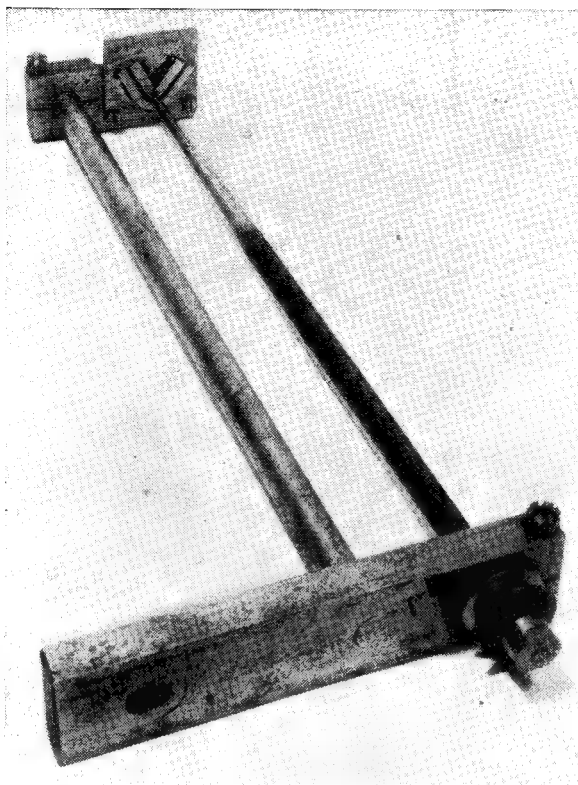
A copying attachment for the lathe, used for shaping the turbine blades
